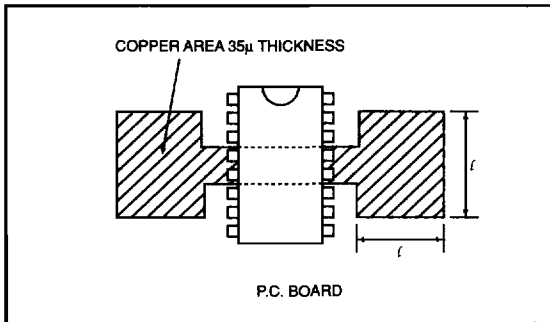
Example of P.C. Board Copper Area Which is Used as Heatsink with 16 lead batwing package.
